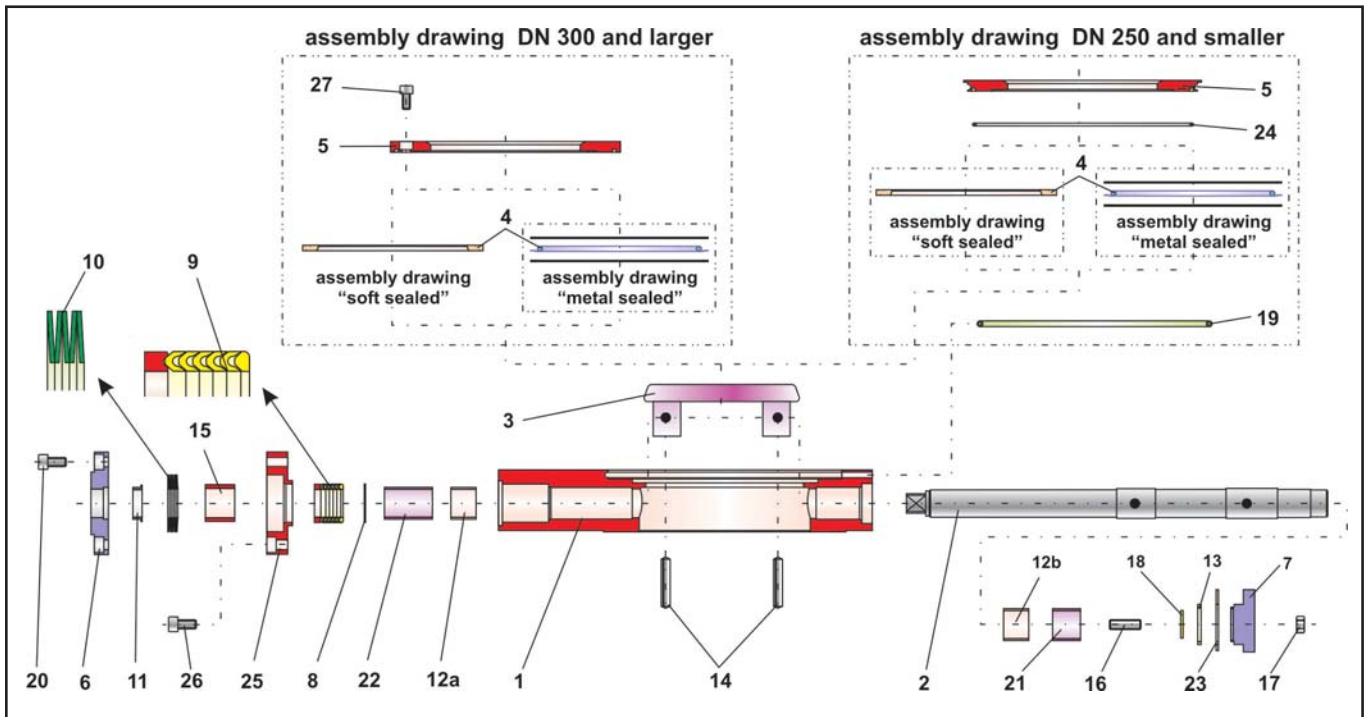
Exploded view of the Butterfly Valve Series 14c/ 74b with live-loaded V-ring packing
